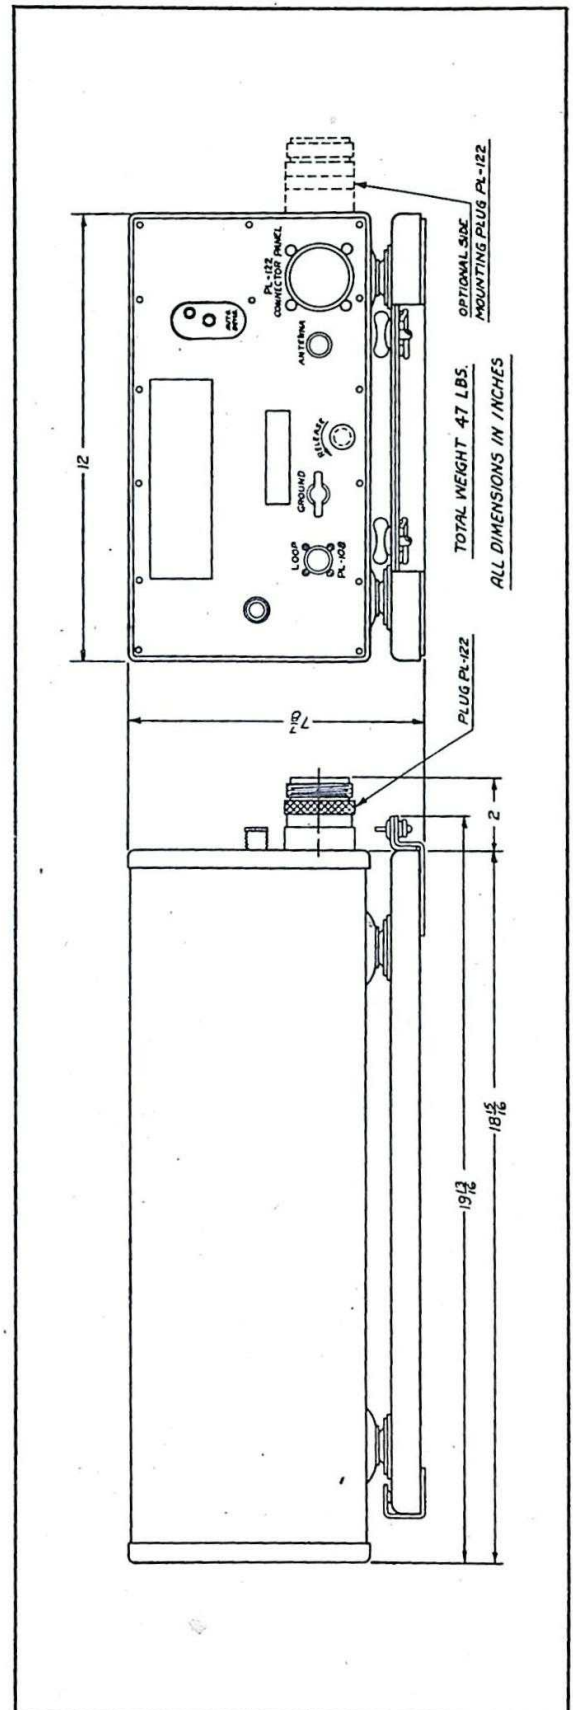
Radio Compass Unit ★R-5/ARN-7—Outline Drawing
